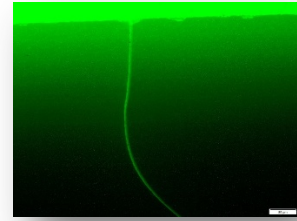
Cross Section. Thanks to fluorescence it is confirmed that the crack was before cross section.
